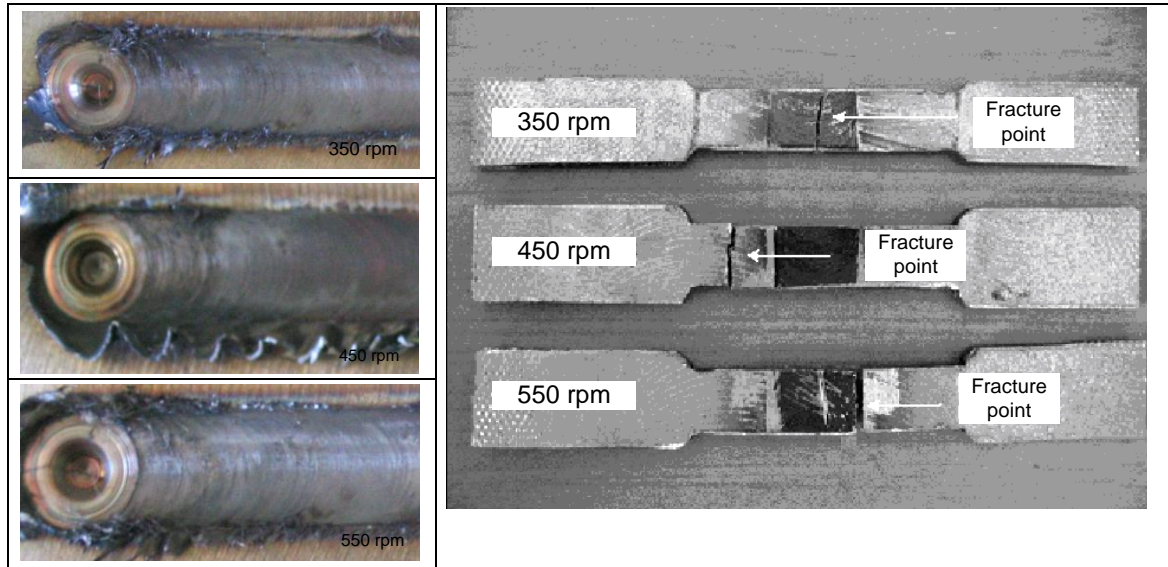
Physical appearances of weldments and fracture points on tensile test specimens.
